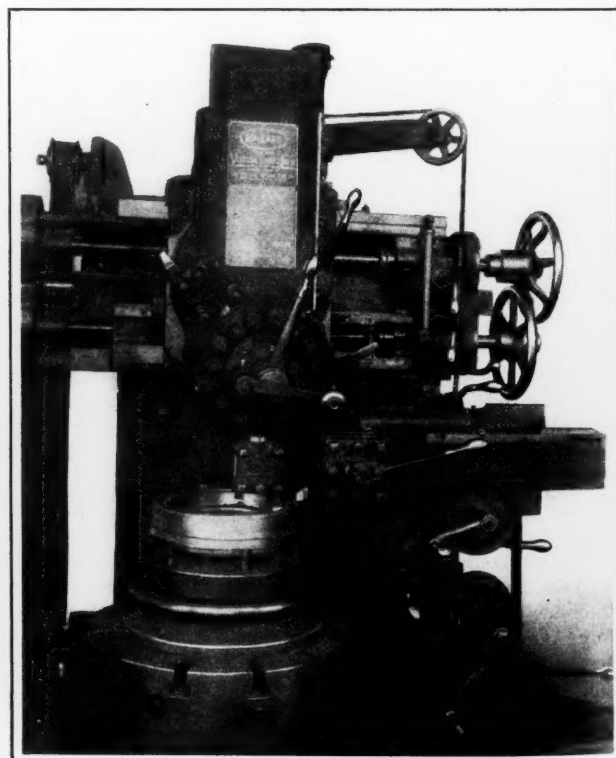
Fourth Chucking in the Vertical Turret Lathe—finishing the Clutch Side
